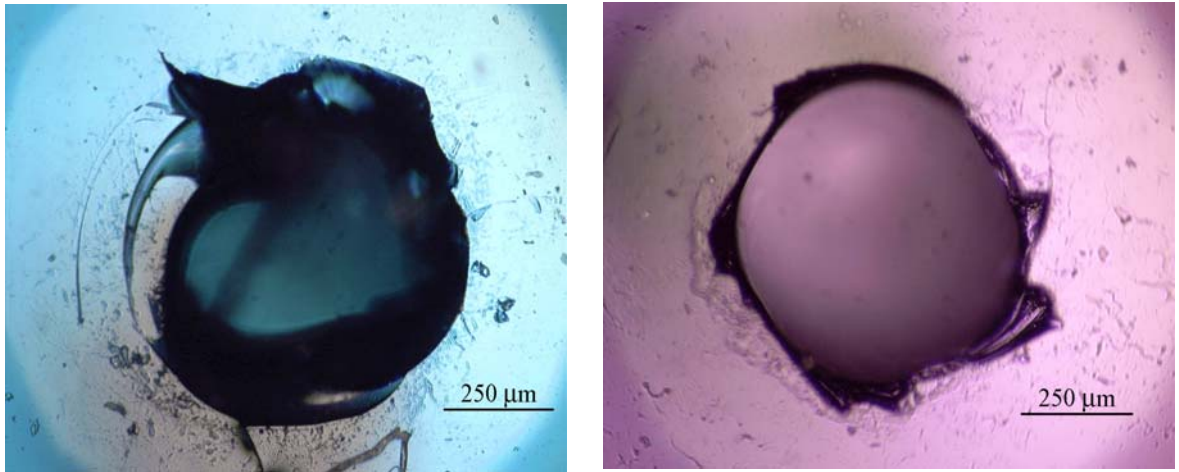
(a) Optical picture for the non-circular hole punched with OD 0.84mm glass capillary. (b) Optical picture for circular hole punched with OD 0.84mm glass capillary.
